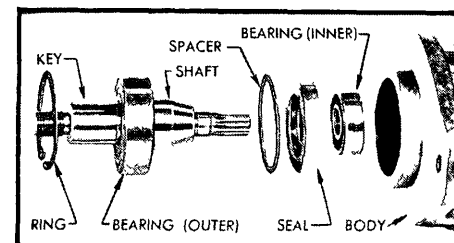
Drive shaft, bearings and seal of Vickers pump
